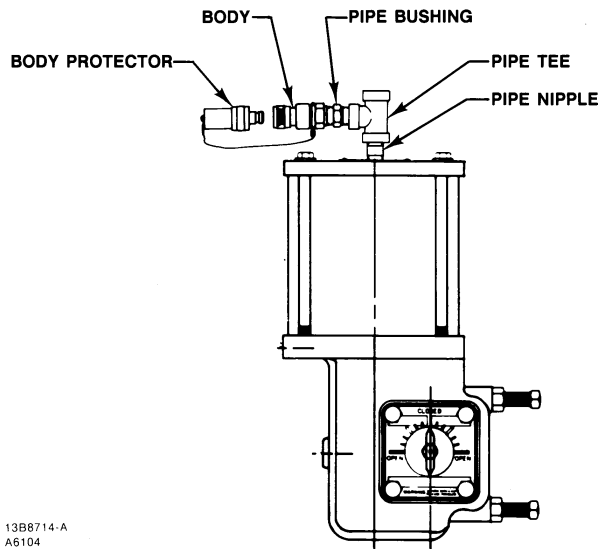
Type 1066, 1066SR Piston Rotary Actuator
